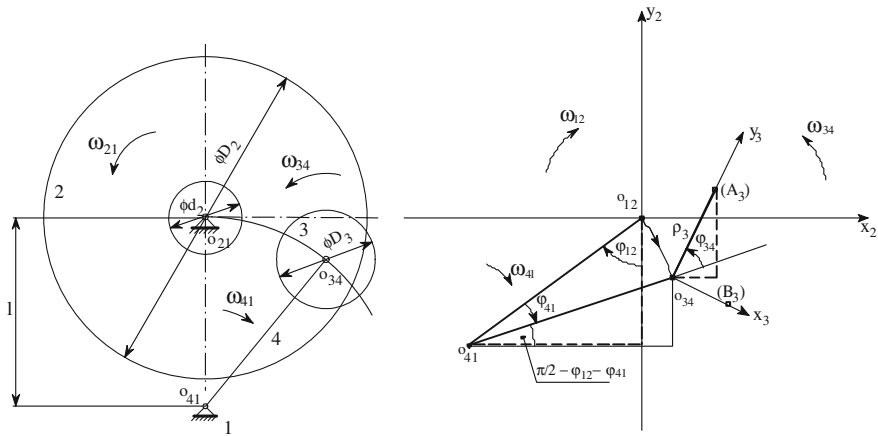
Schematic mechanism of grinding machine and kinematics motion
